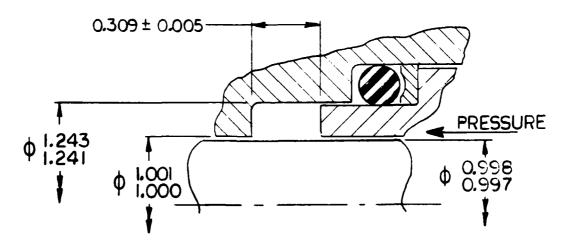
ROD TEST FIXTURE GLAND DIMENSIONS
